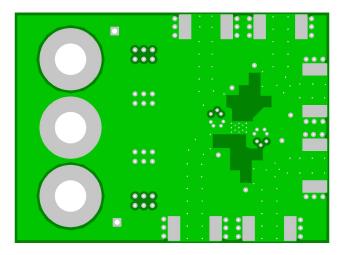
THS3092 EVM Board Layout (Bottom Layer)
